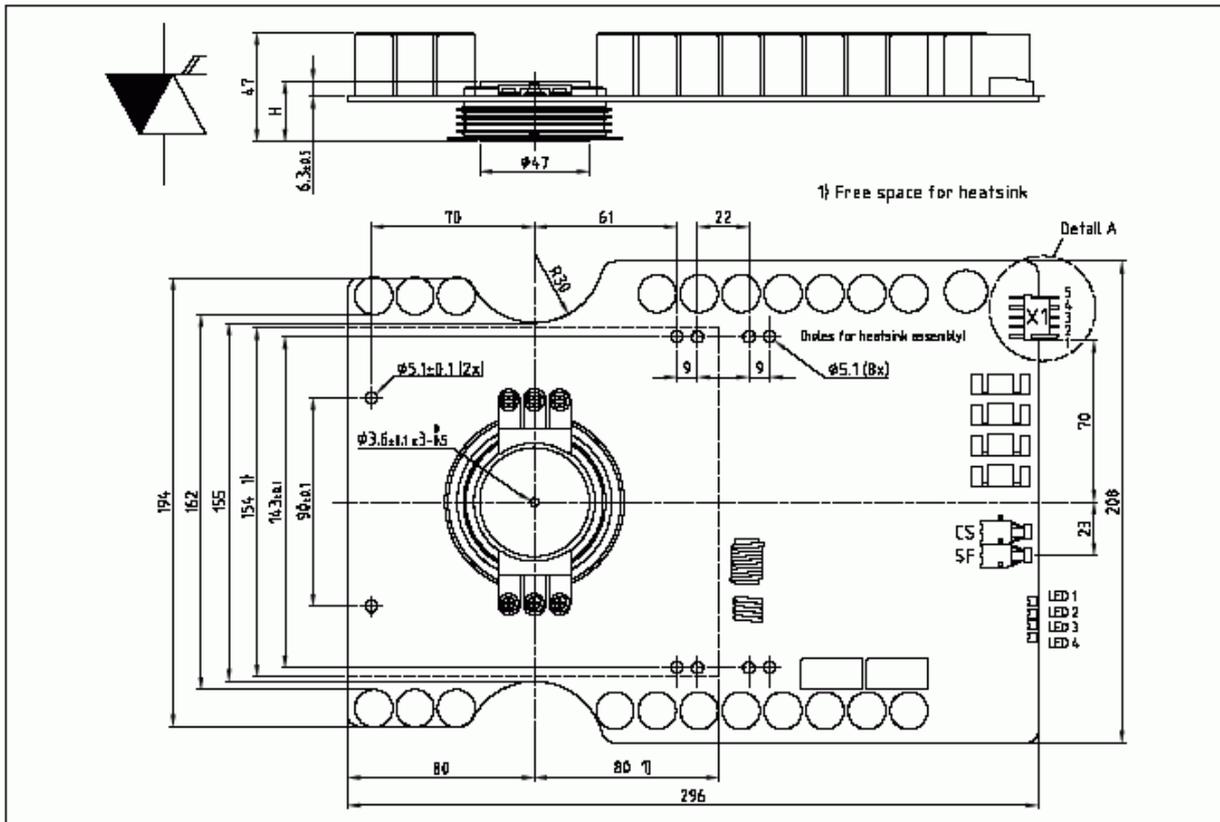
Outline drawing; all dimensions are in millimeters and represent nominal values unless stated otherwise
